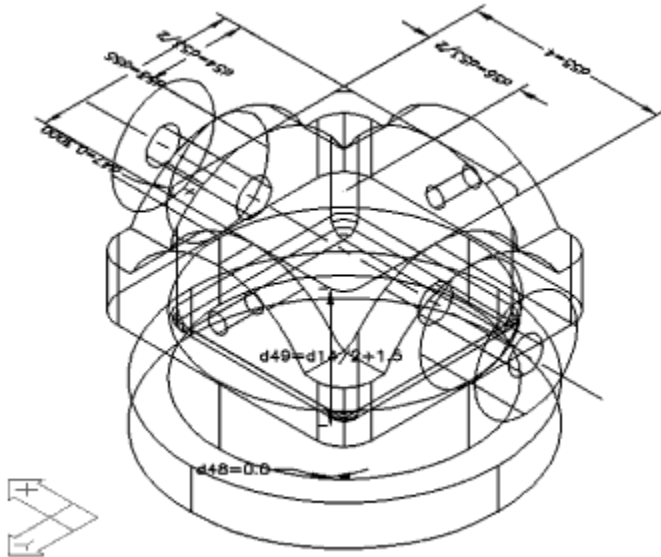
If you had to pick a dimension to edit, would you rather see this...
